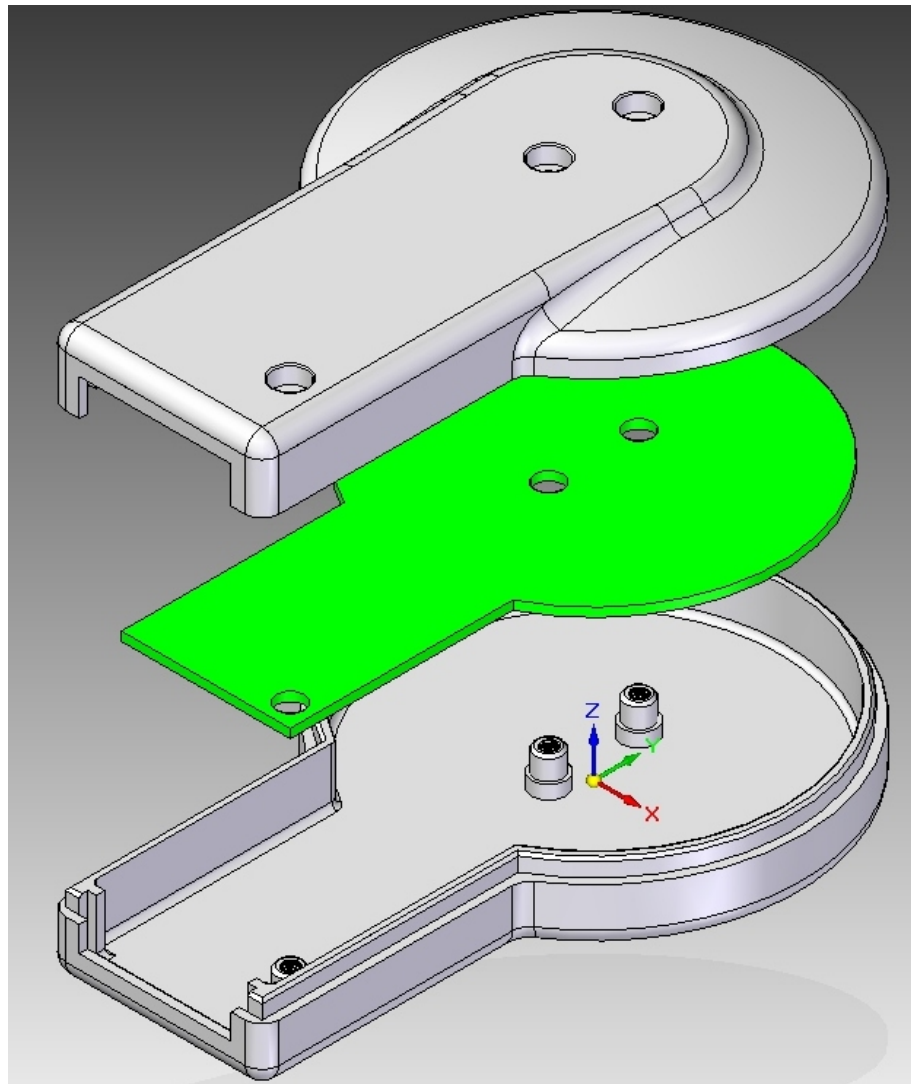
3D CAD Model of the Coil Housing and Coil PCB (shown in green)
